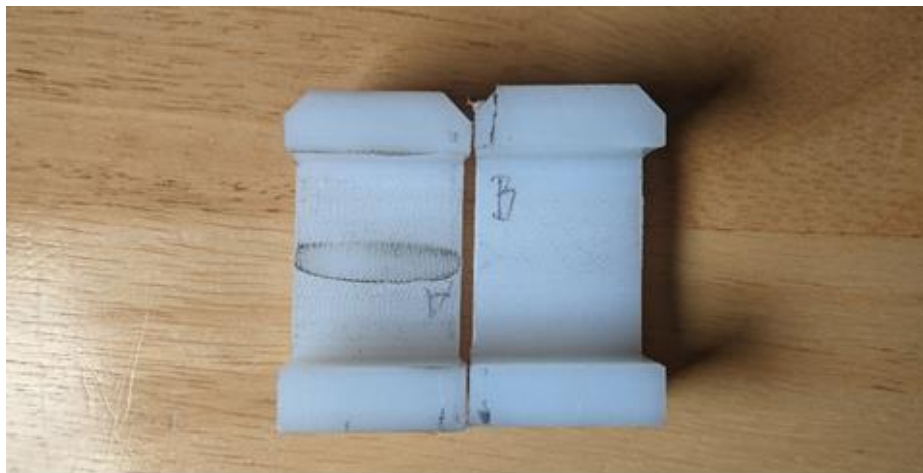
Front bottom bushings. Wear in set A is much more pronounced.
